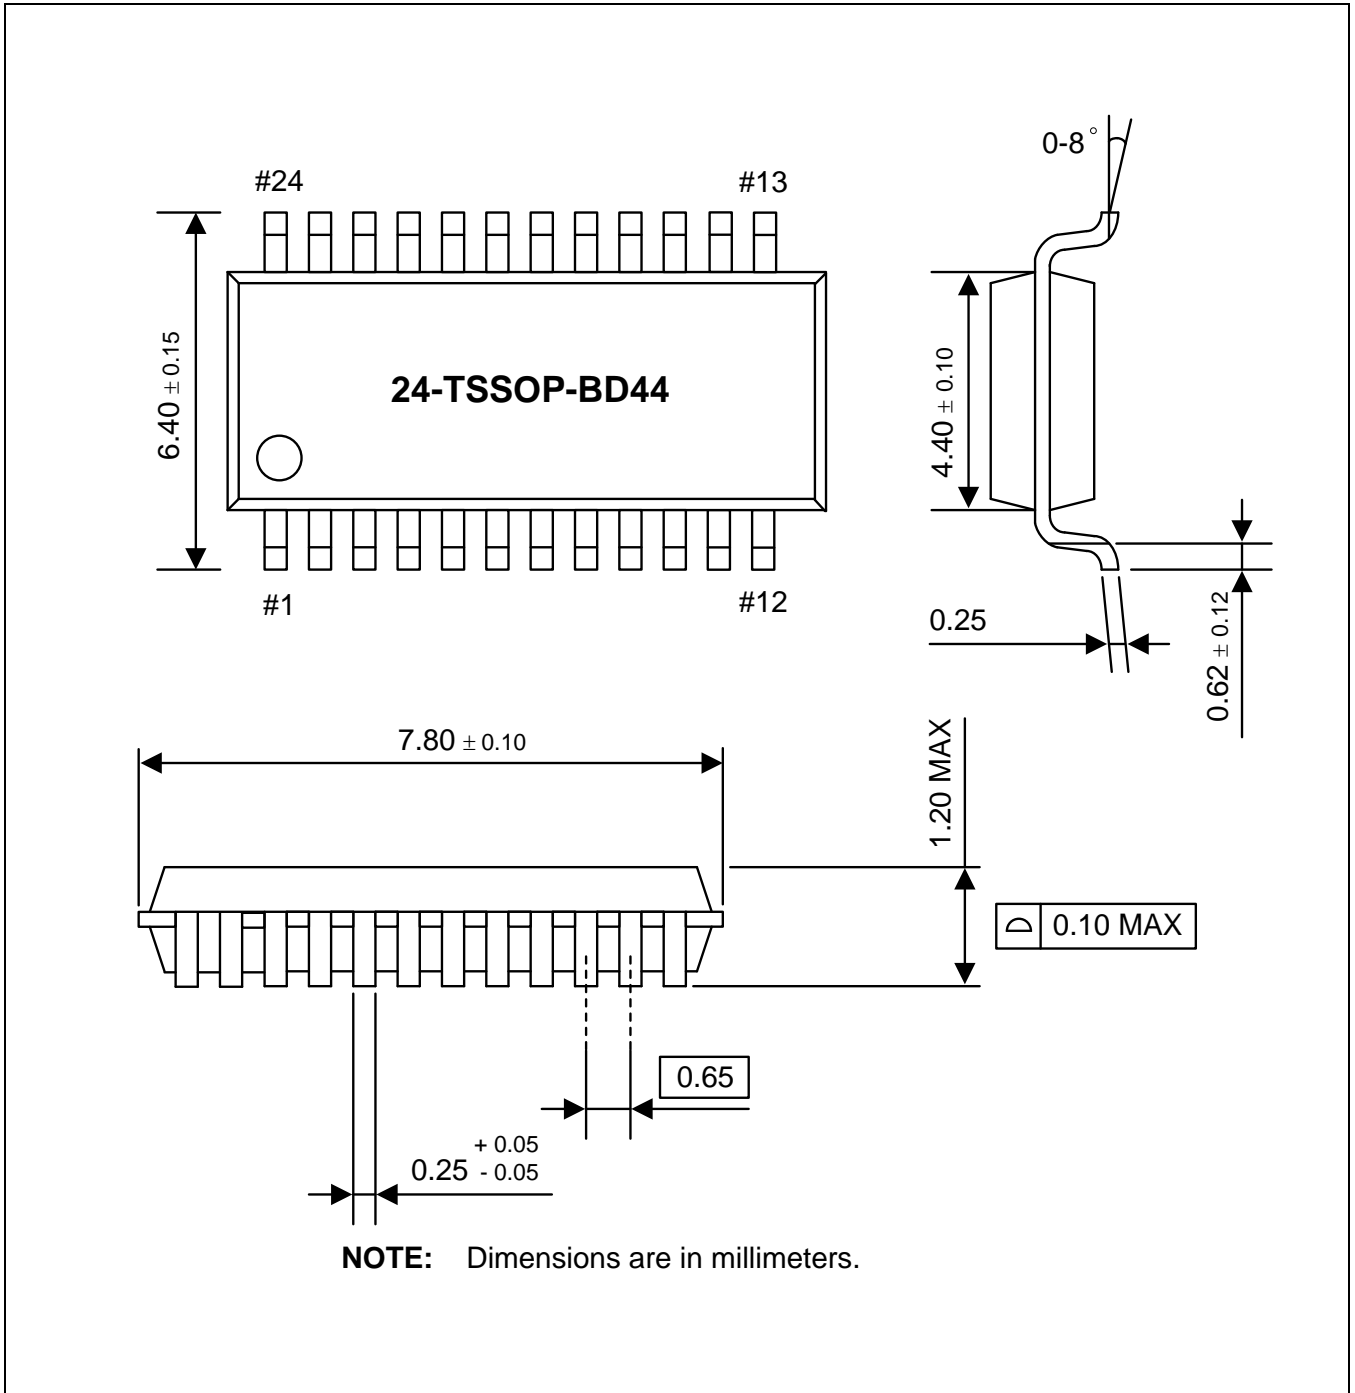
24-TSSOP-BD44 Package Dimensions
